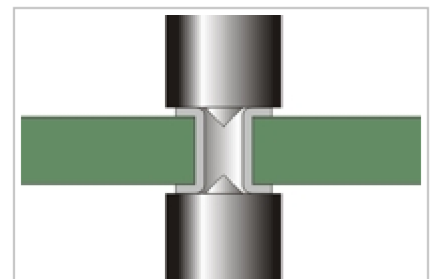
Flatten the eyelet barrel using the flat end of the setting tool.
